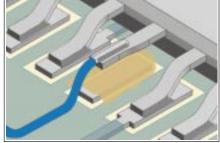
Acceptable* Wire soldered to lifted component lead. +
